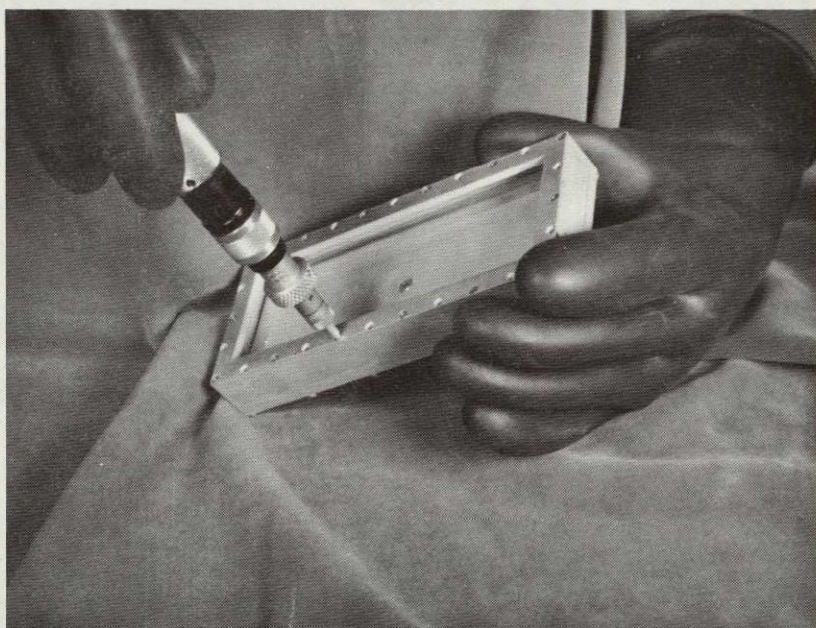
Simulated Transfer Cabinet Assembly of MEED Tray
